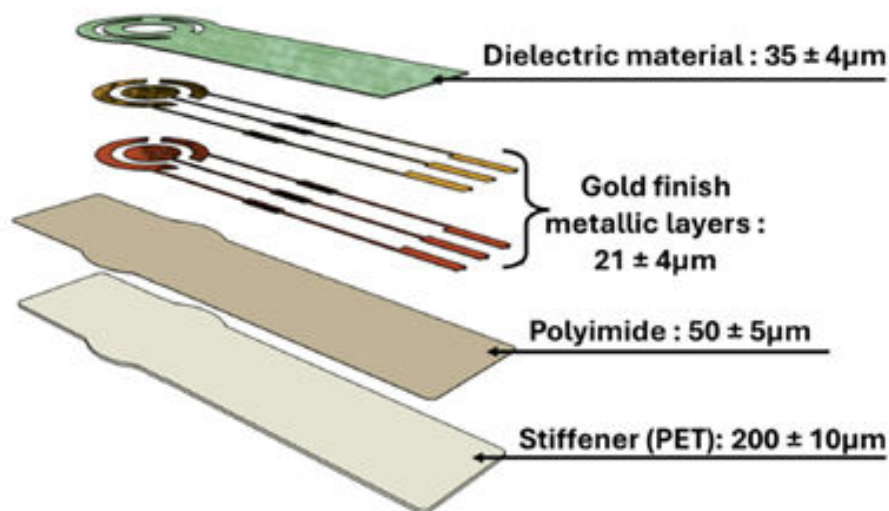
Linxens UniFlex™ Gold: Exploded View
